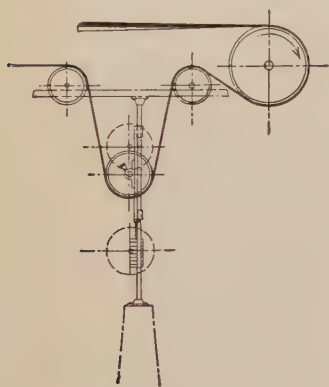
"Gravity" Take-up for Belt Conveyor.
